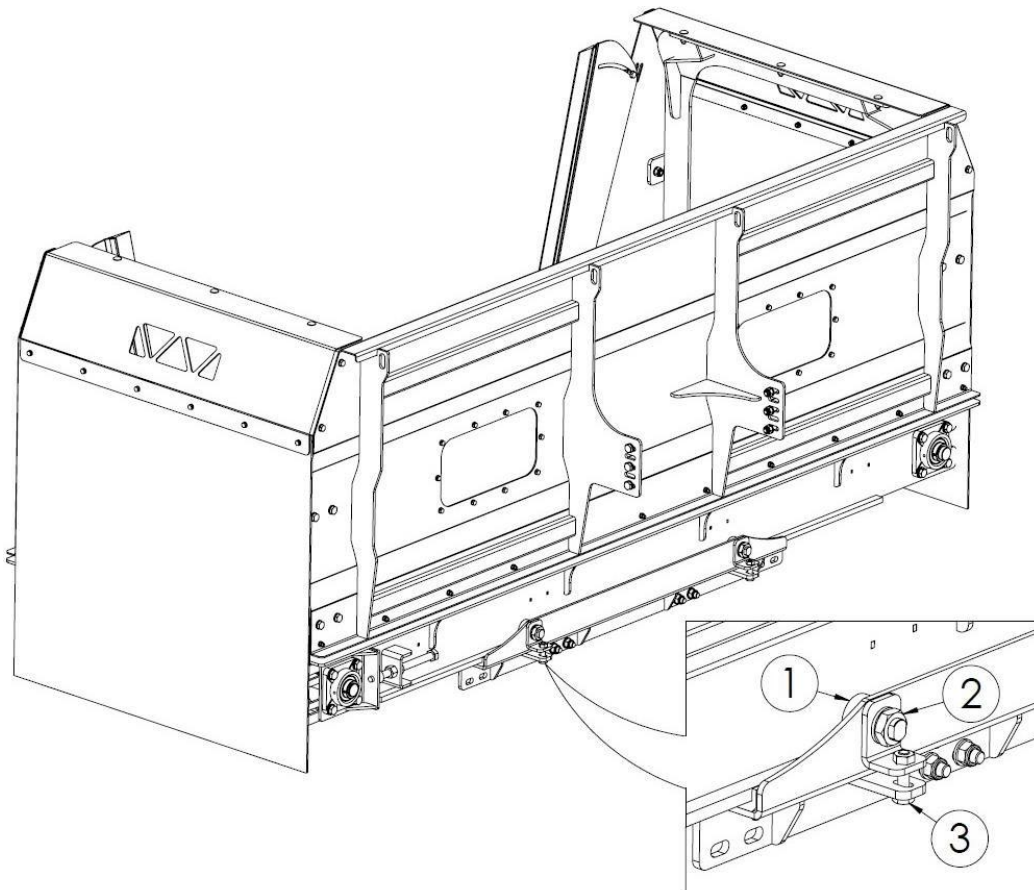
Sliding bearing tension: 1- bearing, 2 - nut, 3 - tensioning screw
